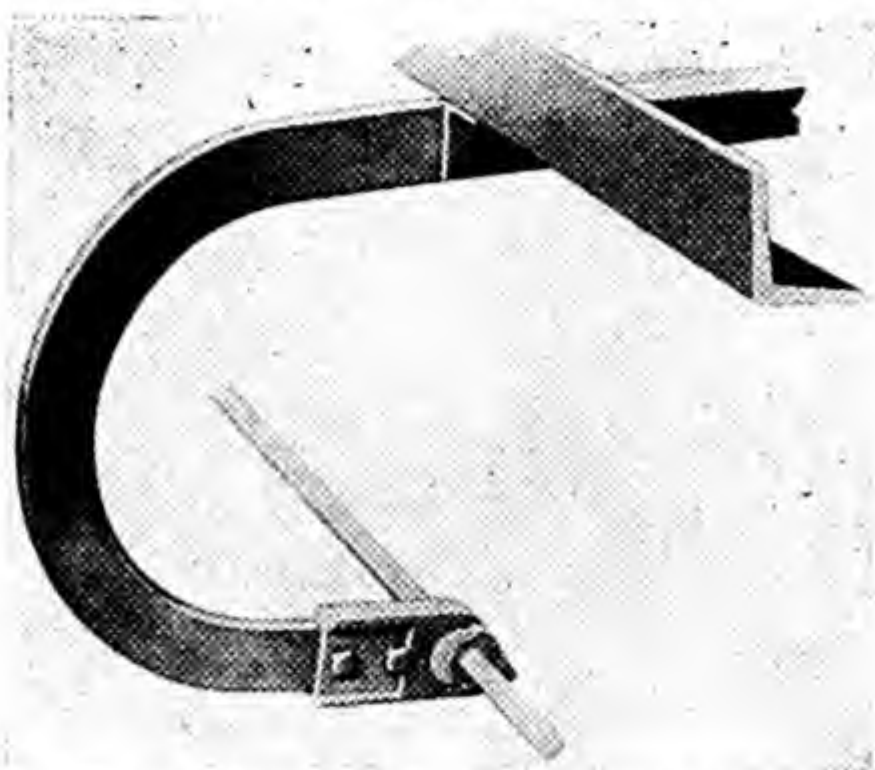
Beam, shoe, and bearing square rod-weeder rods.
